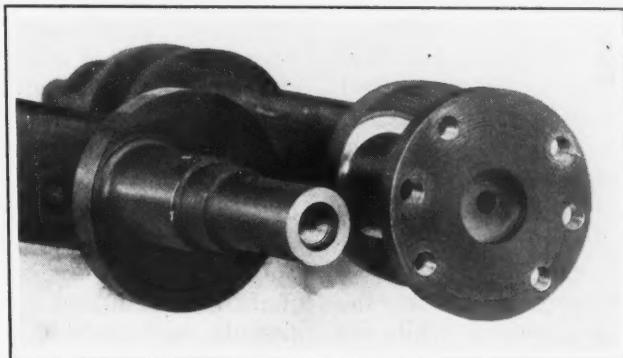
Opposite Ends of Crankshafts Drilled, Reamed, Tapped, and Faced on Machine Shown in Fig. 2
